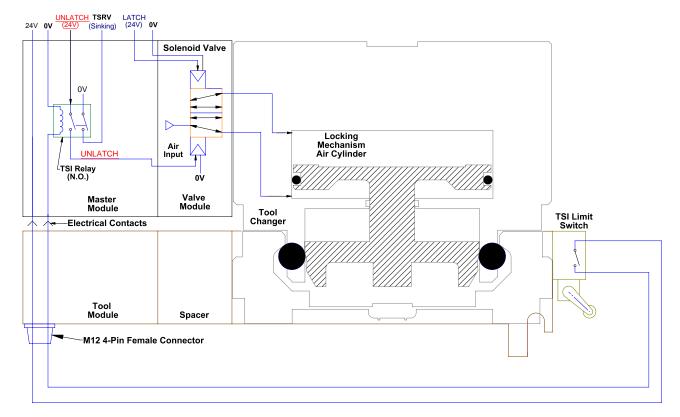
TSI Circuit with Master and Tool Locked (free of stand)
